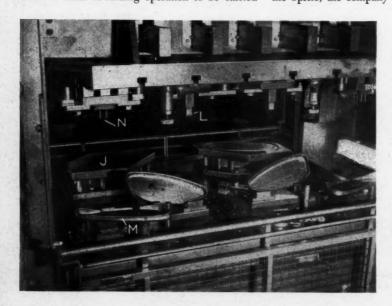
Multiple tool set-up on a Wilkins & Mitchell press for drawing, piercing, and coining the side shields seen in Fig. 6. Right- and left-hand forms are produced simultaneously
